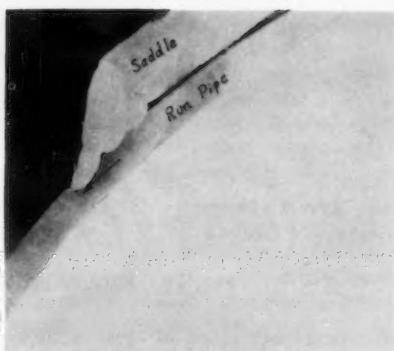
Saddle Reinforced Connection, Side Opposite Failure Showing Start of Crack.
